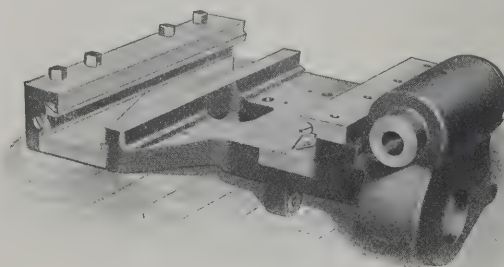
Cutter Slide Reversed, to show Gibs and Bearing Surfaces
